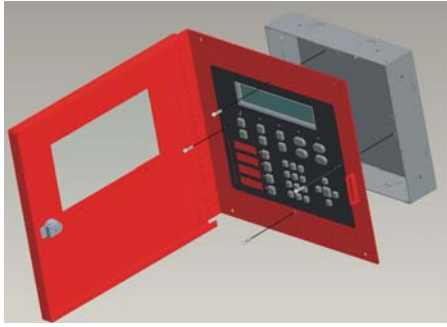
Attaching Annunciator/Door Assembly to Backbox
